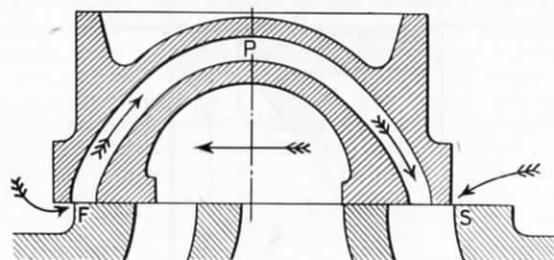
LOCOMOTIVE SLIDE VALVE
